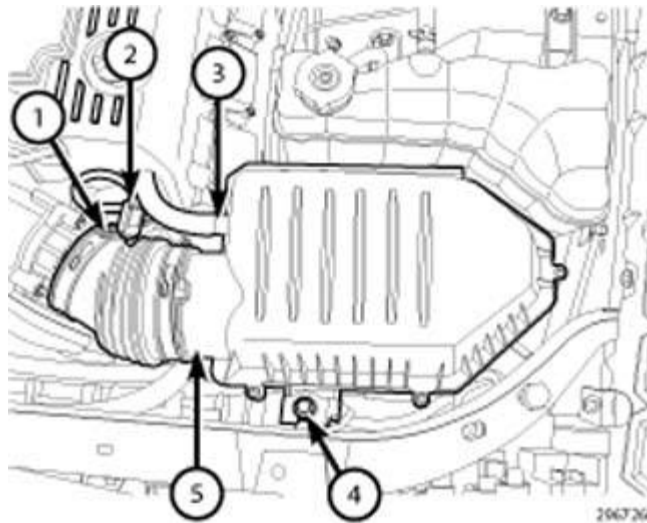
Air Duct Retaining Clamp, Intake Air Temperature Sensor Electrical Connector, Makeup Air Hose, Bolt & Air Cleaner Housing
